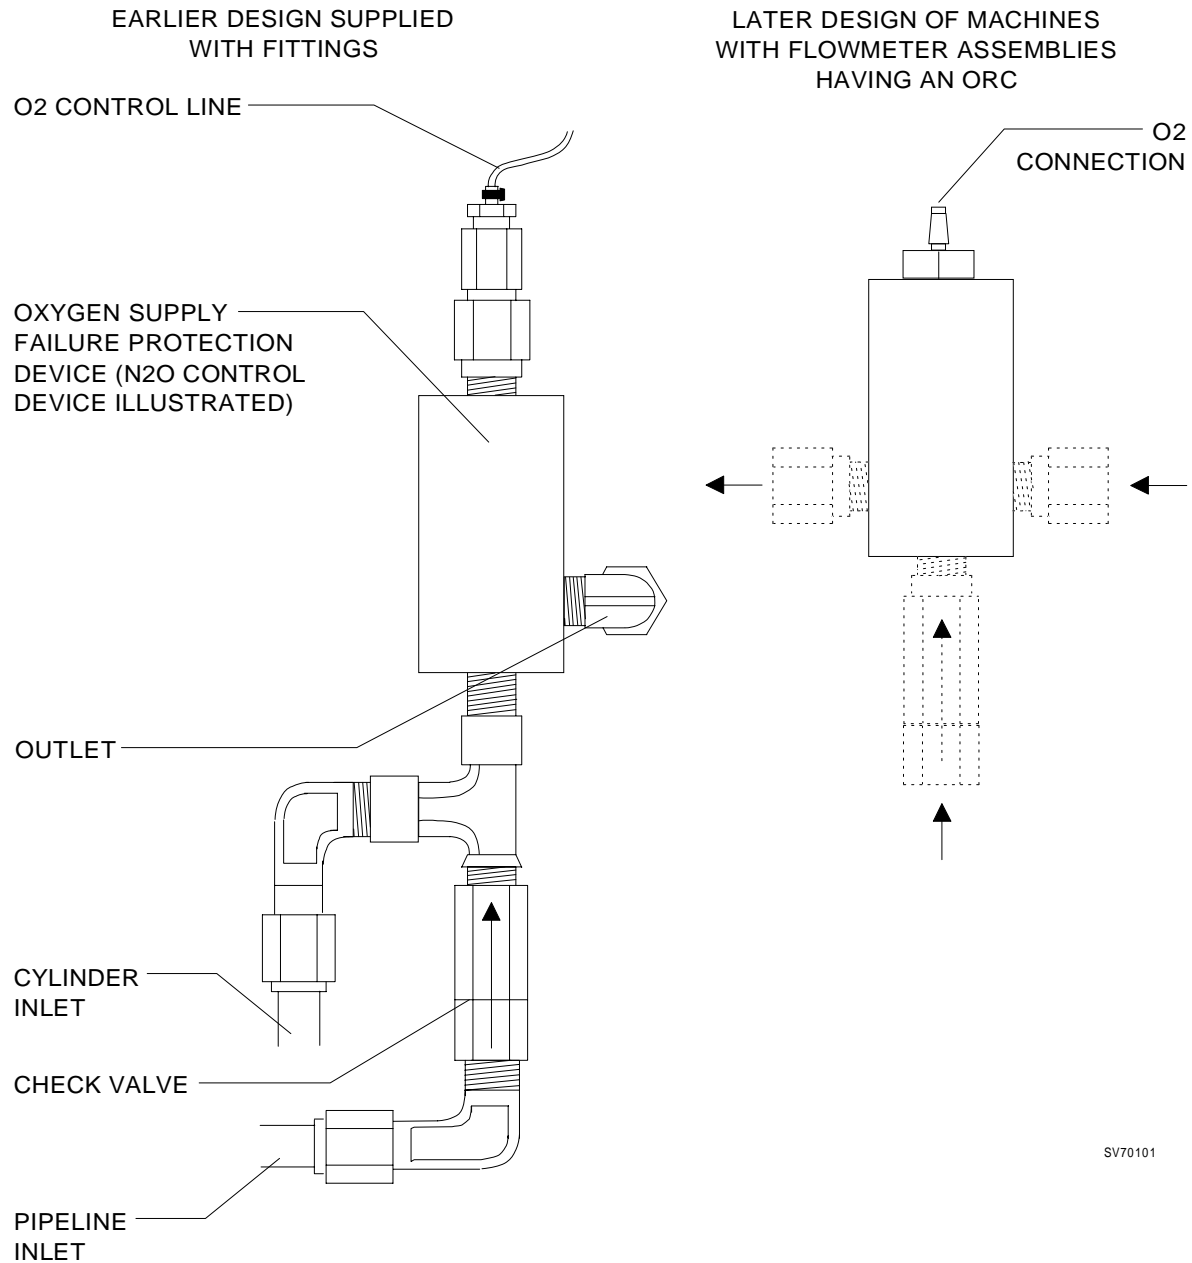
OXYGEN SUPPLY FAILURE PROTECTION DEVICE
